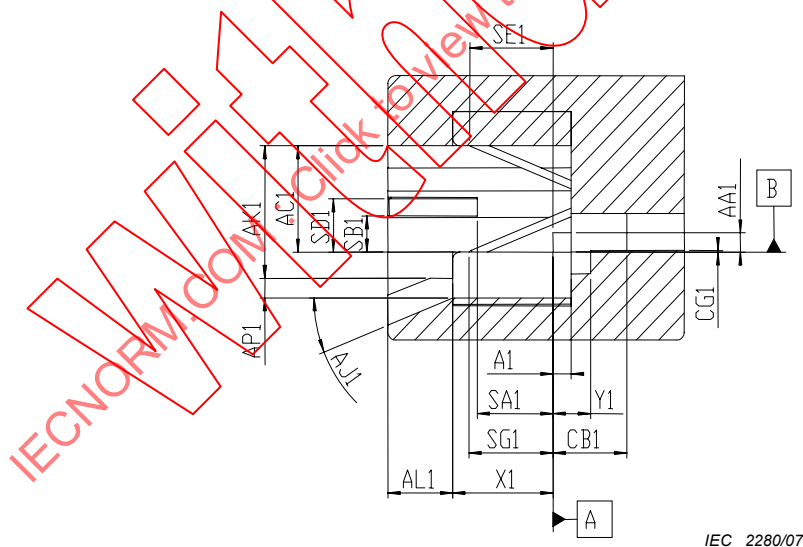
Physical interface, fixed connector, side view – Dimensions
